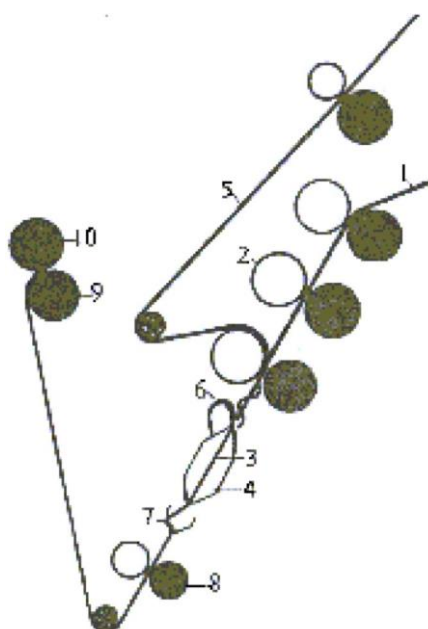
Flow sheet of a hollow spindle spinning frame with a drawing mechanism:
